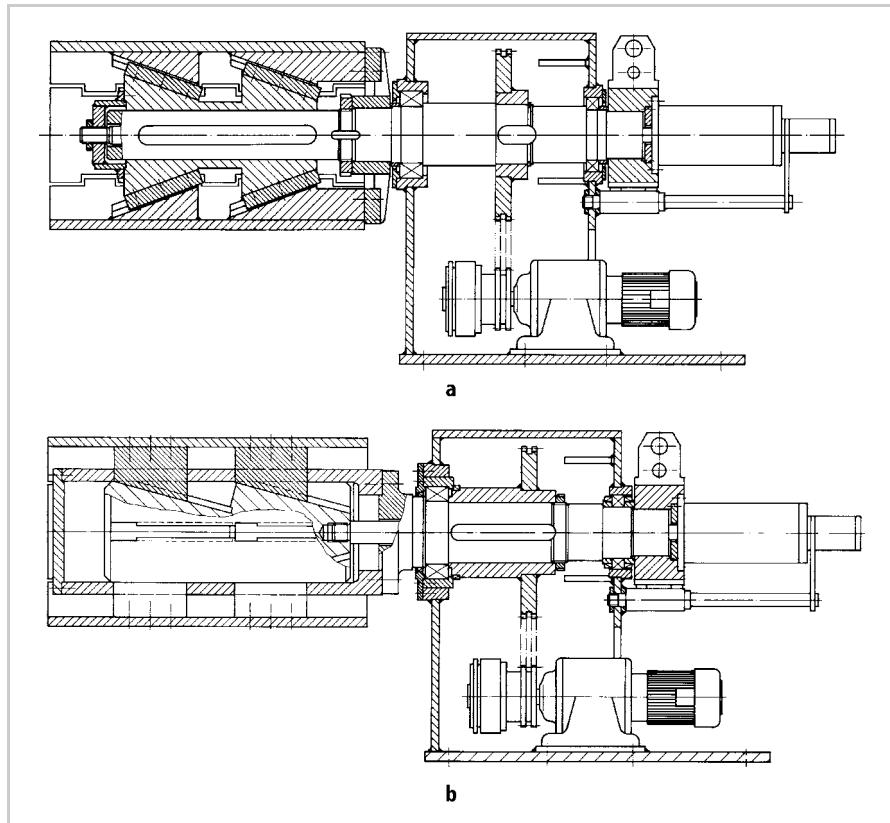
Winding machine (Ernst Julius KG): a winding head with integrated drive unit; b winding head with separate drive unit
